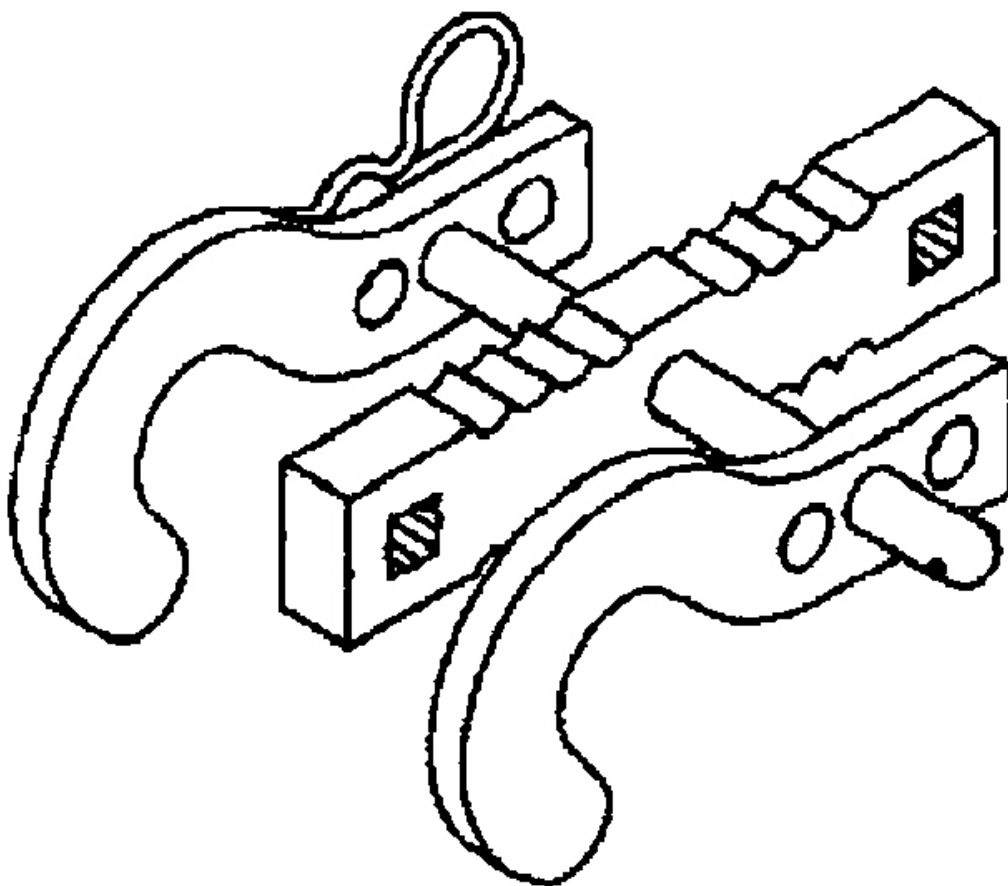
Identifying Camshaft Seal Installer MD-998306
